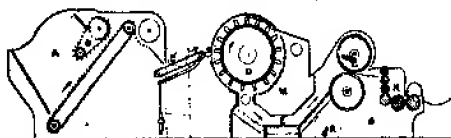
HORIZONTAL OPENER WITH SINGLE BEATER.
